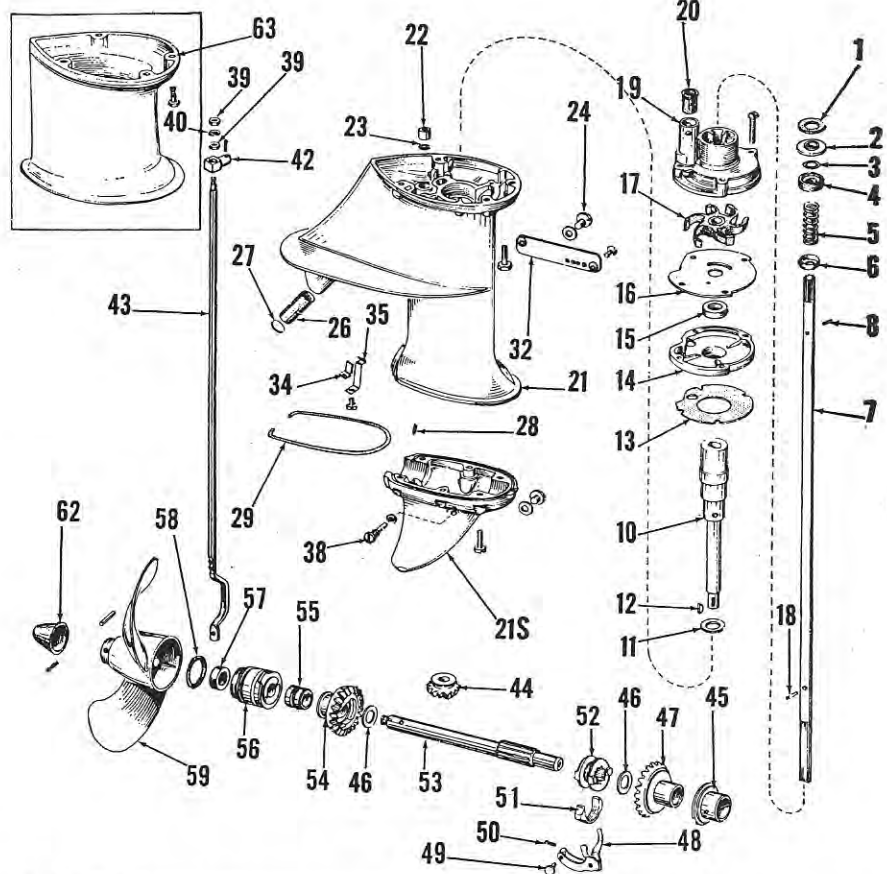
Exploded view of lower unit gearcase and associated parts used on models 5S11 through 5S14.
